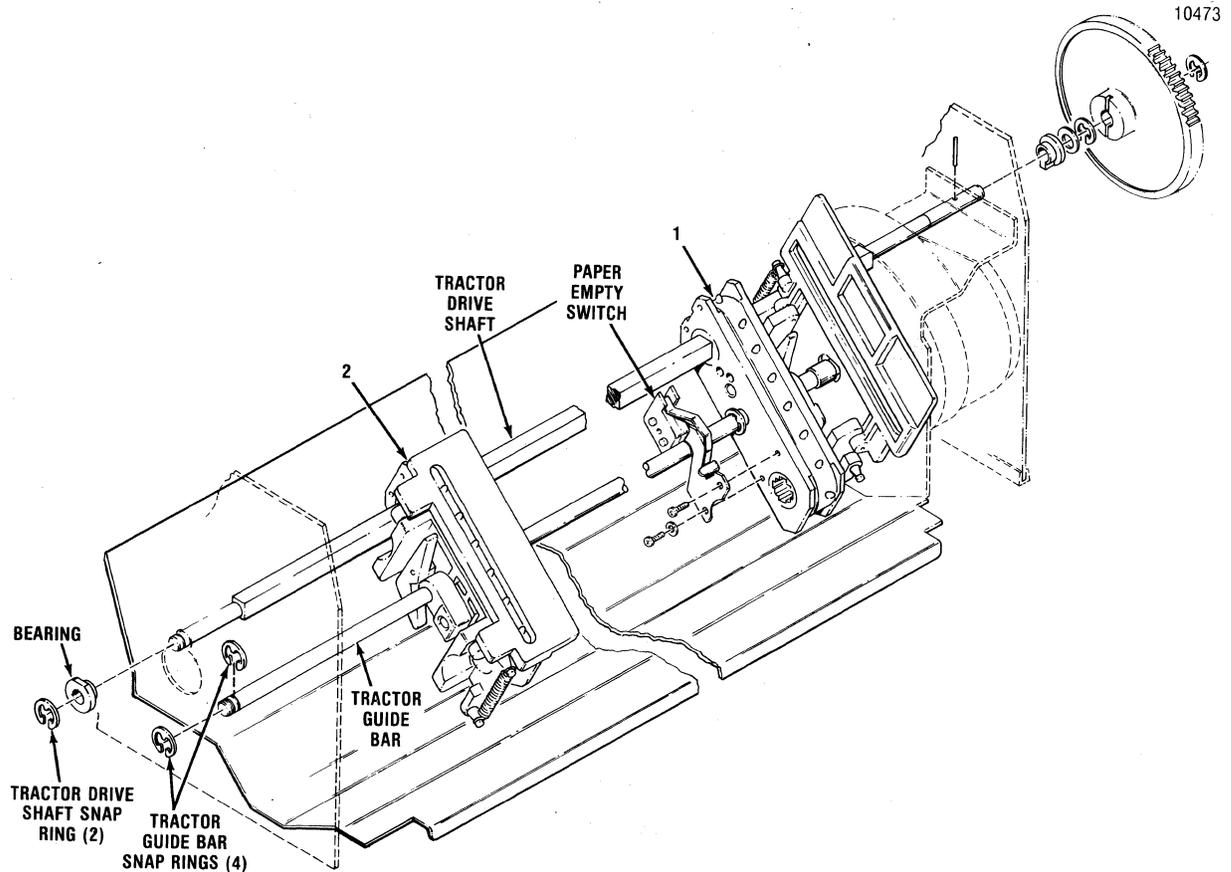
REMOVAL/REPLACEMENT, TRACTOR ASSEMBLIES
